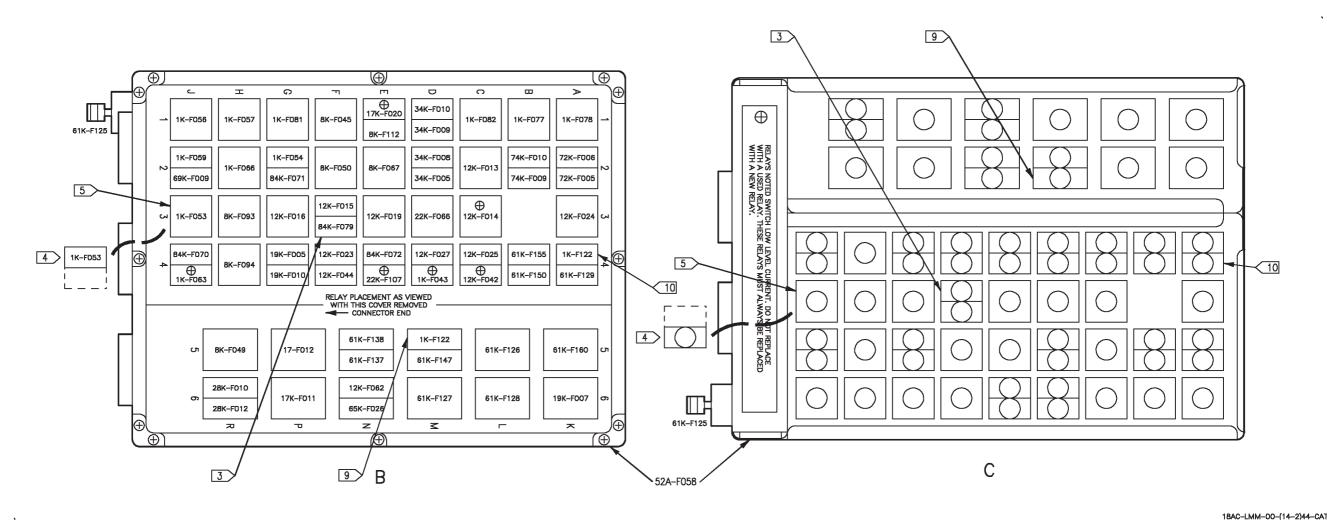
No. 2 Relay Panel Assembly - 52A-F058 (Sheet 2)
